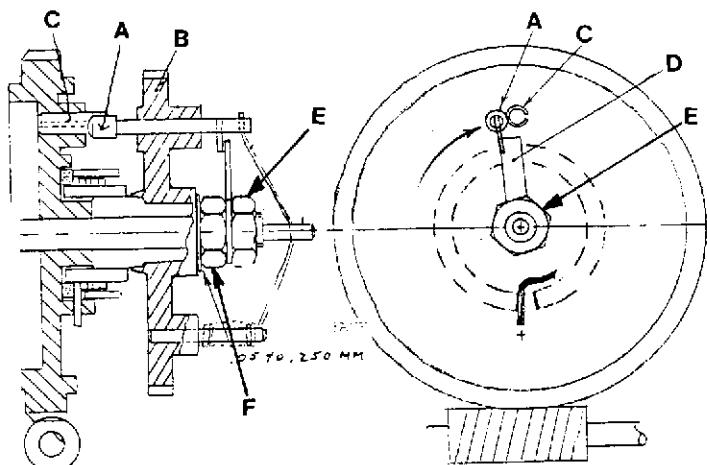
FEED SPROCKET CLUTCH ADJUSTMENT
